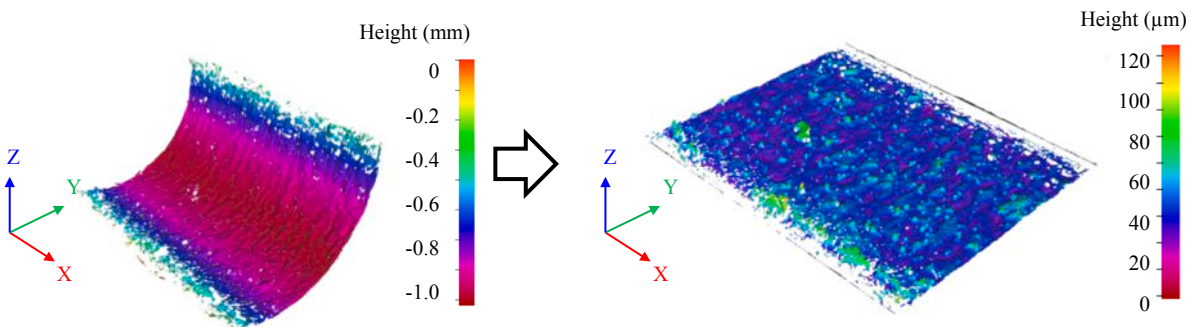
“Form removal” process of the straight channel surface (type #3): (a) internal channel surface and (b) “form removed” surface.
